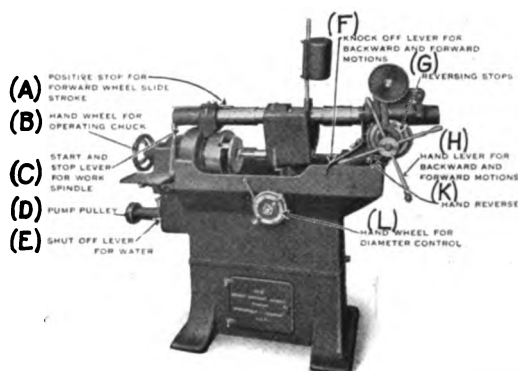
Bryant No. 6 Semi-Automatic Hole Grinder
